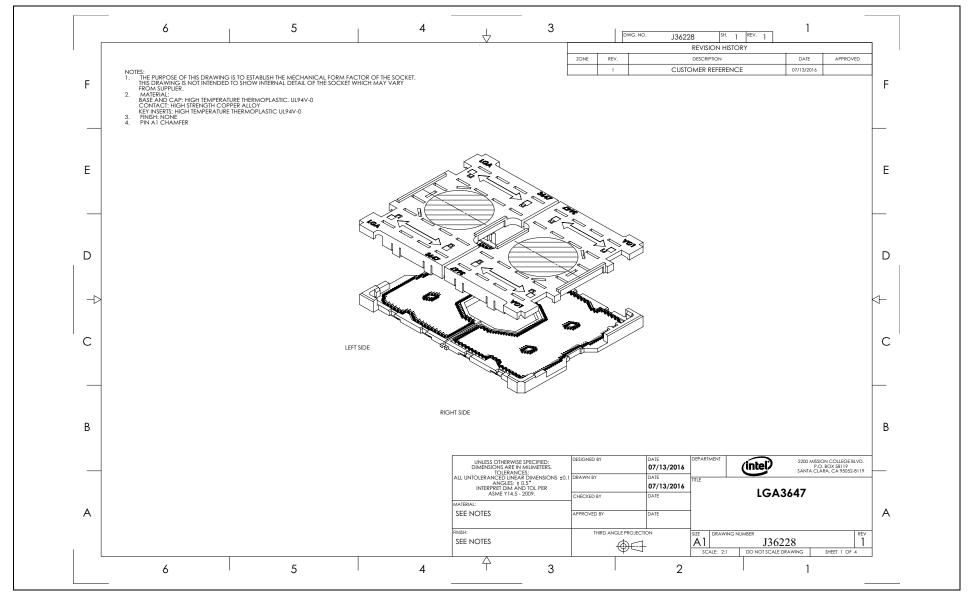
Socket Mechanical Drawing (Sheet 2 of 4)
